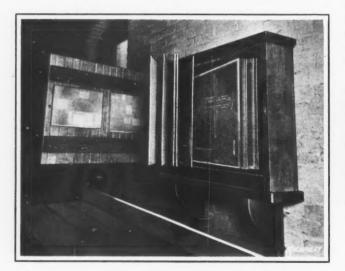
Blueprint Cabinet containing Sketches with Instructions for indexing the Fixture
